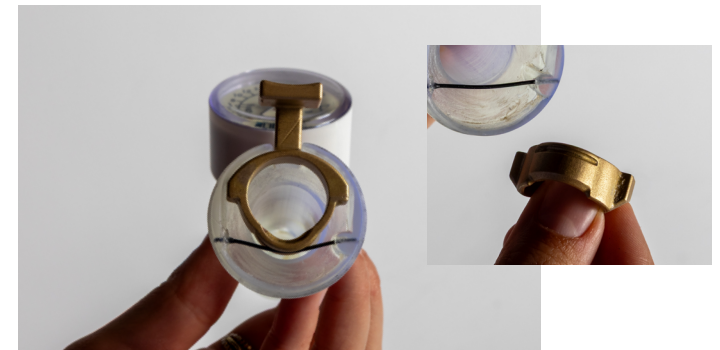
6. Fit the half nut inside the barrel. The nitinol rod should fit into the groove of the half nut.
